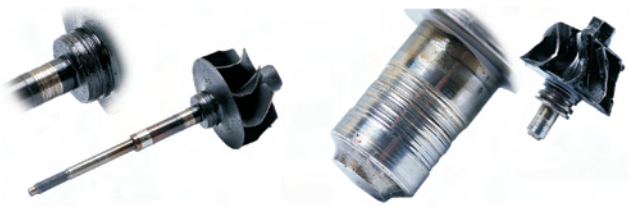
Damage of the journal surface of the turbocharger shaft following lubrication with contaminated oil [5]
